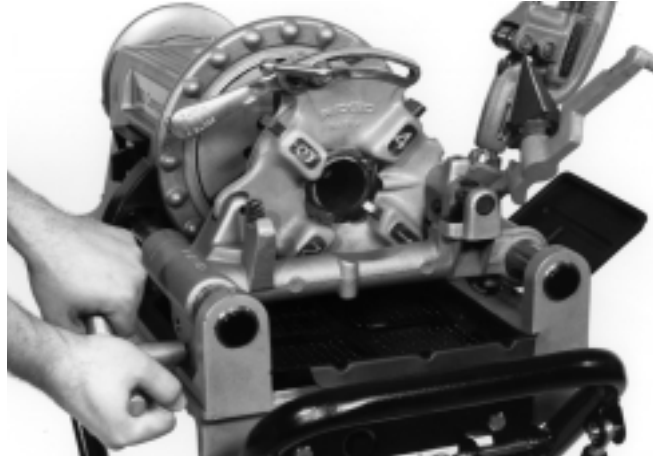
Threading Pipe With No. 811-A Quick Opening Die Head
